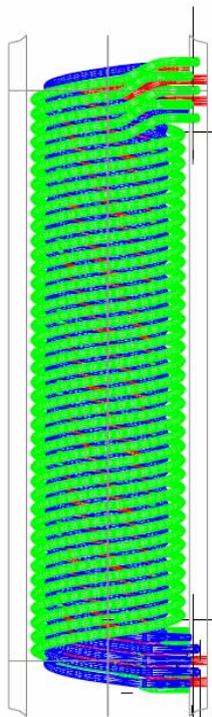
Drawing of the helical steam generator tubes used in OSU-MASLWR.
